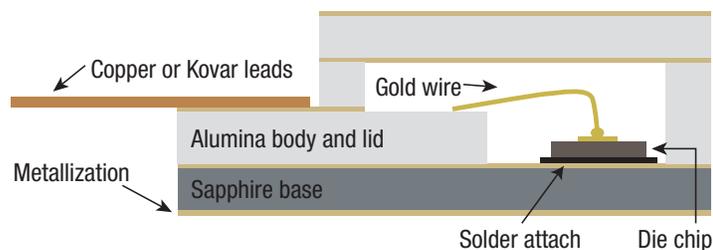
Cutaway view of the Cernox SD commercial package.
